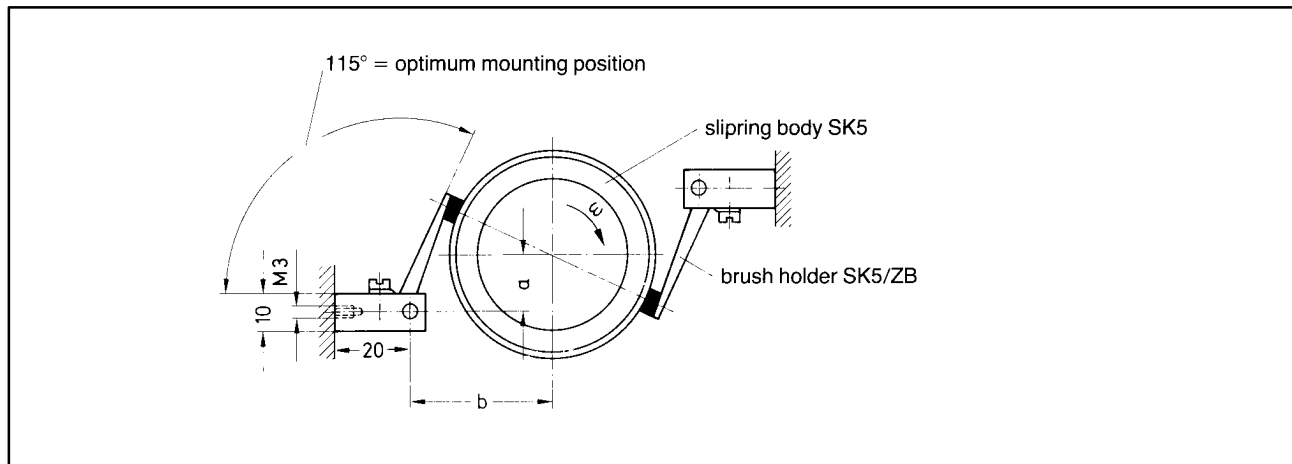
Slipping body SK5 with brush holder SK5/ZB, mounting example
